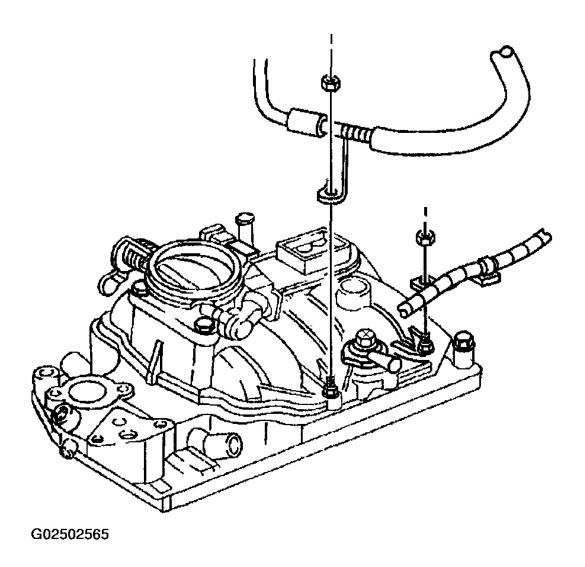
Connecting Manifold Absolute Pressure Sensor & EVAP Canister Purge Solenoid Valve Connectors
